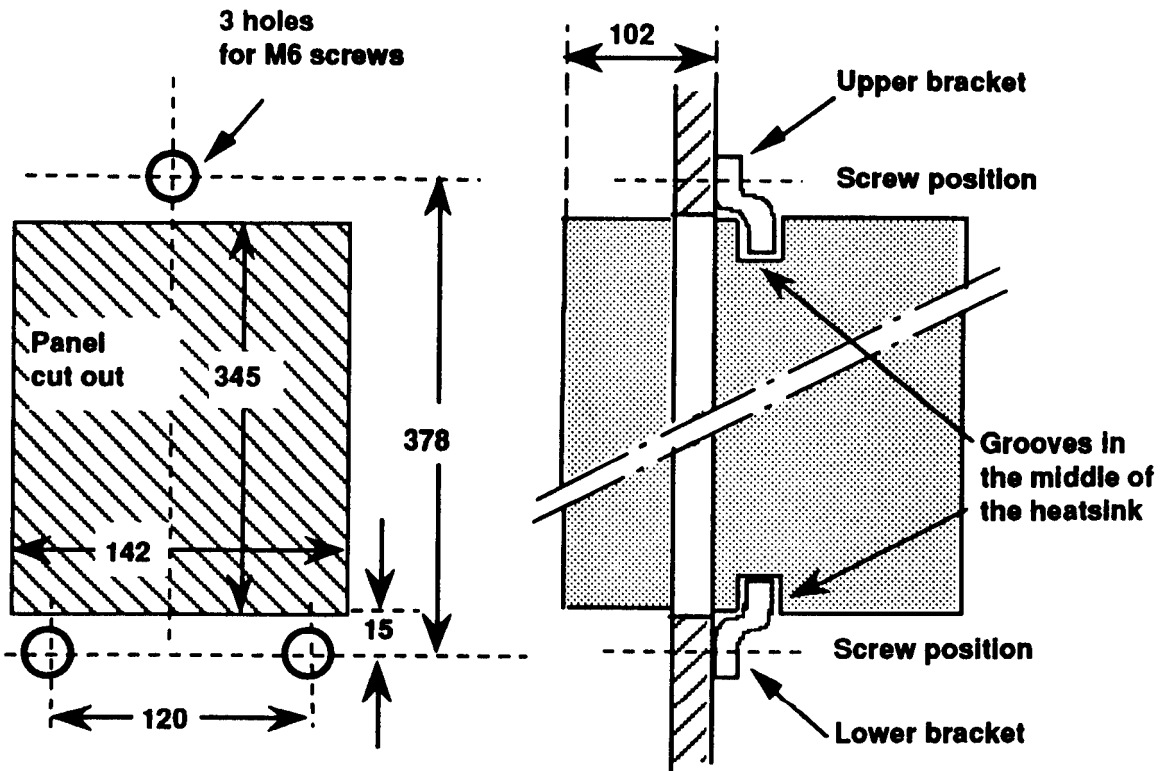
Drilling dimensions, panel cut-out and mounting of a convection cooled unit, through panel mounting
